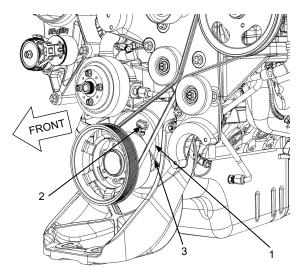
Camshaft (CMP) Sensor Electrical Connector location (2), Engine Harness (3), Engine Front Cover (1)
